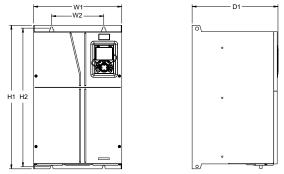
Wall-mounting diagram of inverters of 380 V, 90 to 110 kW
